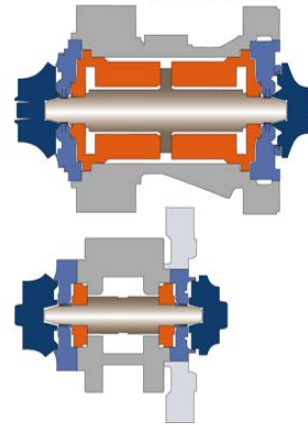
Turboexpander Rotating Assembly Comparison between Active Magnetic (Top) and Oil Bearing (Bottom) Systems
